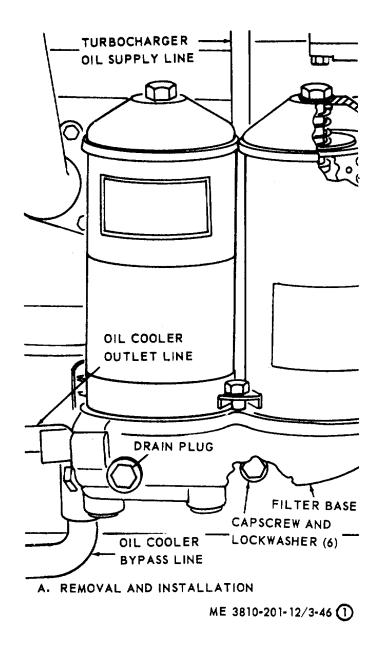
Oil filters, removal, disassembly, reassembly and installation for engine Model D333TA (sheet 1 of 2).
